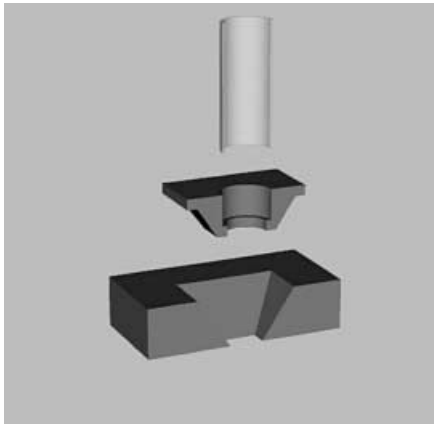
3D Exploded cross-sectional view of a bulk coupler assembly
